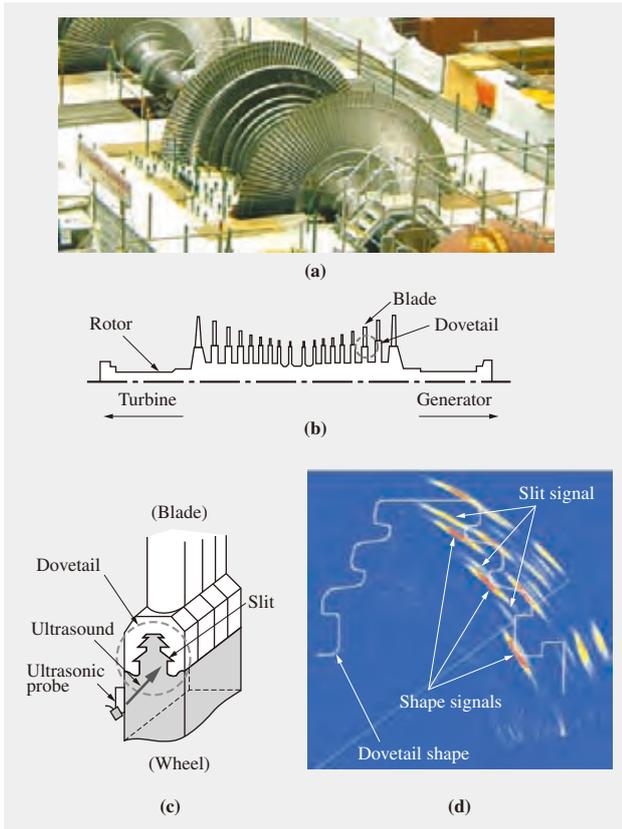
Ultrasonic Testing of Dovetail Joints in the Low-pressure Rotor Wheel of a Steam Turbine. Steam turbine (a), axial cross-section of steam turbine rotor (b), dovetail joint and probe position (c), and image of dovetail joint captured by phased array ultrasonic testing (d) are shown.
